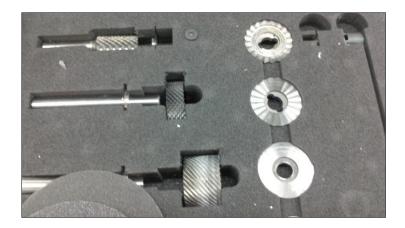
Precision cutting tools used for milling in Experiment 1
